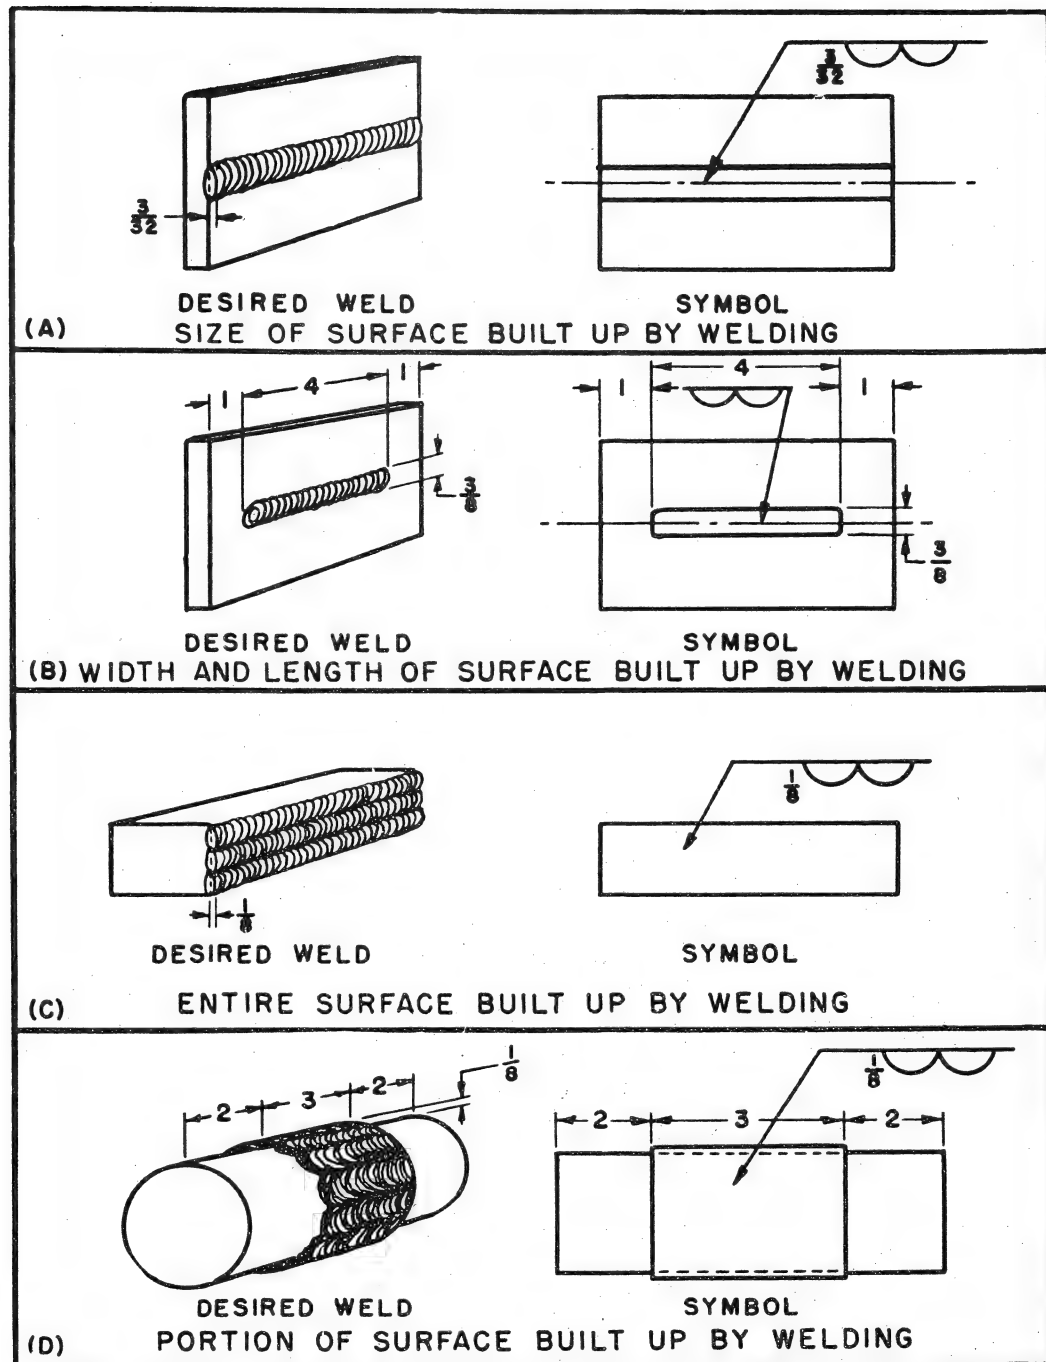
Application of Dual Bead Weld Symbol to Indicate Surfaces Built Up by Welding
